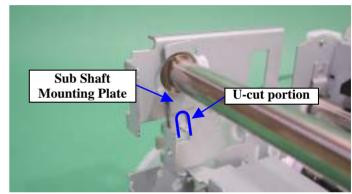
Normal Position of the Sub Shaft Mounting Plate
